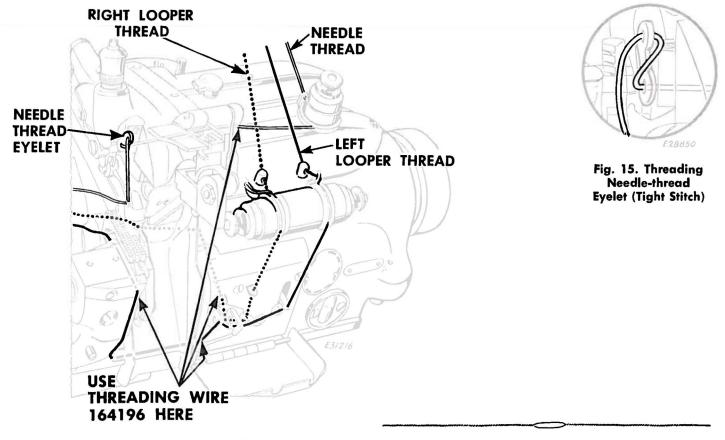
Threading the Machine (Three-thread Tight Stitch)
